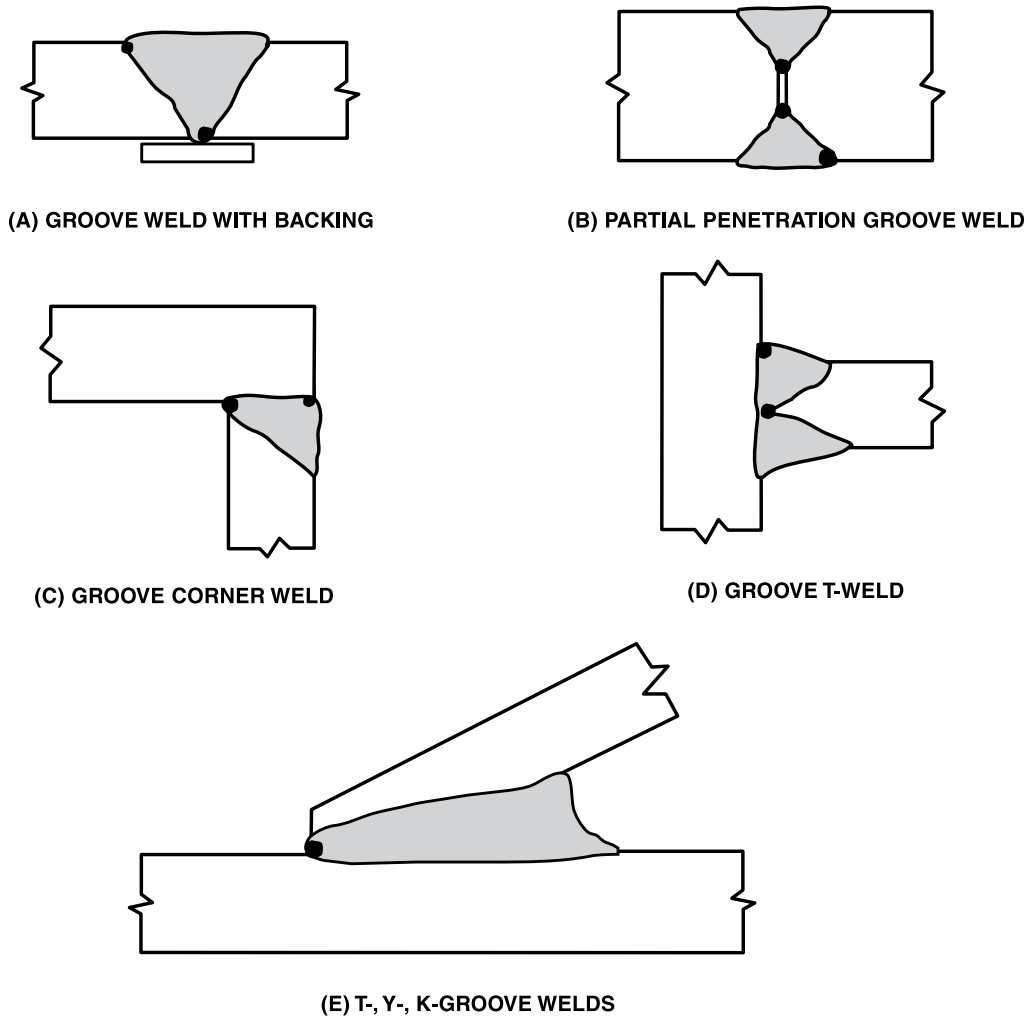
Typical Standard Reflector (Located in Weld Mock-Ups and Production Welds)
